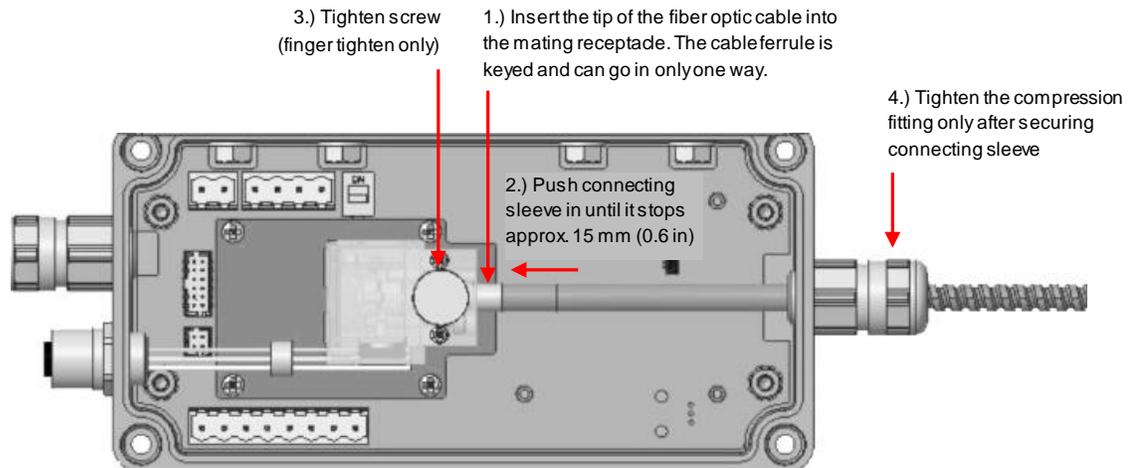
Attaching the Fiber Optic Cable to the Optical Head
